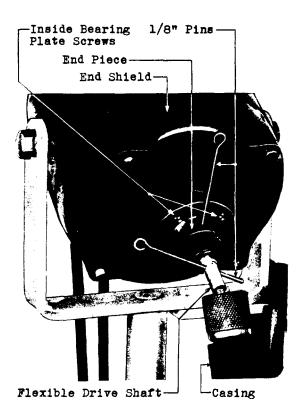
Method of Disconnecting Flexible Shaft from Motor
